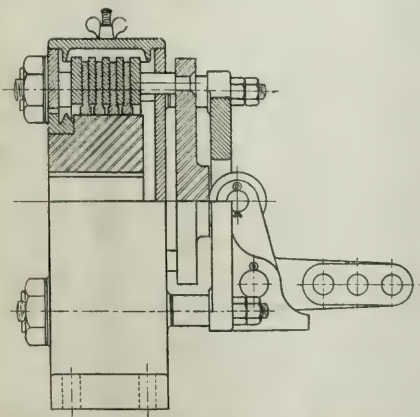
"WESTON" TYPE FOOT-PEDAL BRAKE.
